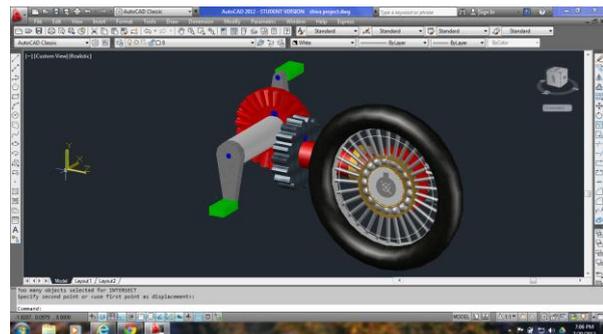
Final arrangement (two wheeler with propeller shaft) (side view)
